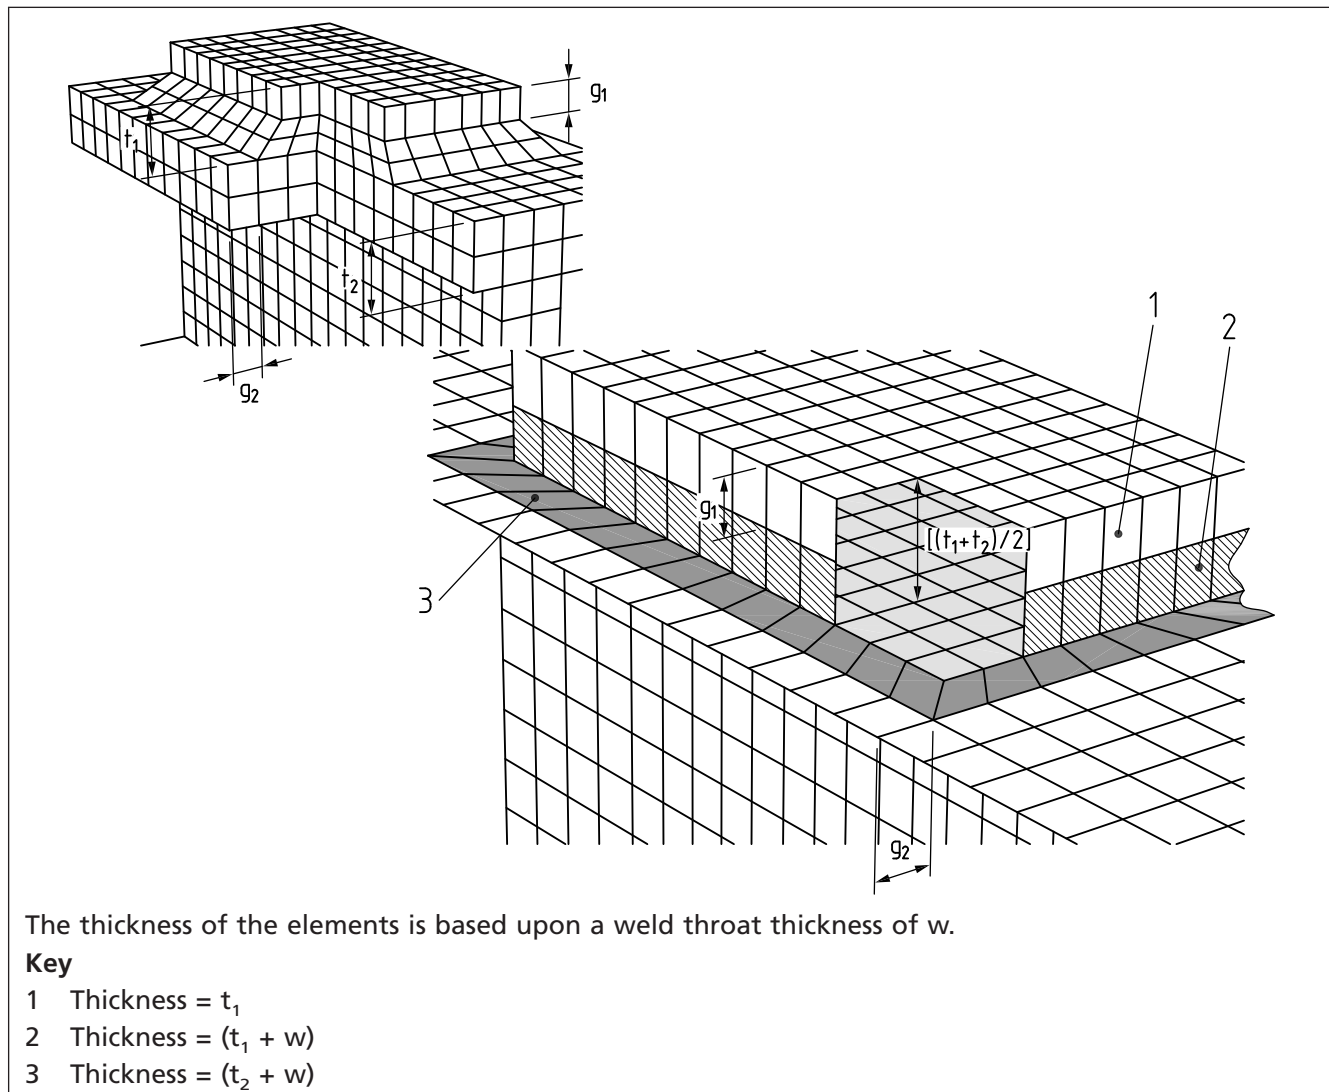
Dimensions used for thicker element representation of a fillet weld
